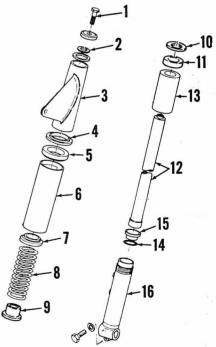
Exploded view of the front suspension system used on YR-1 and YR-2 models.
